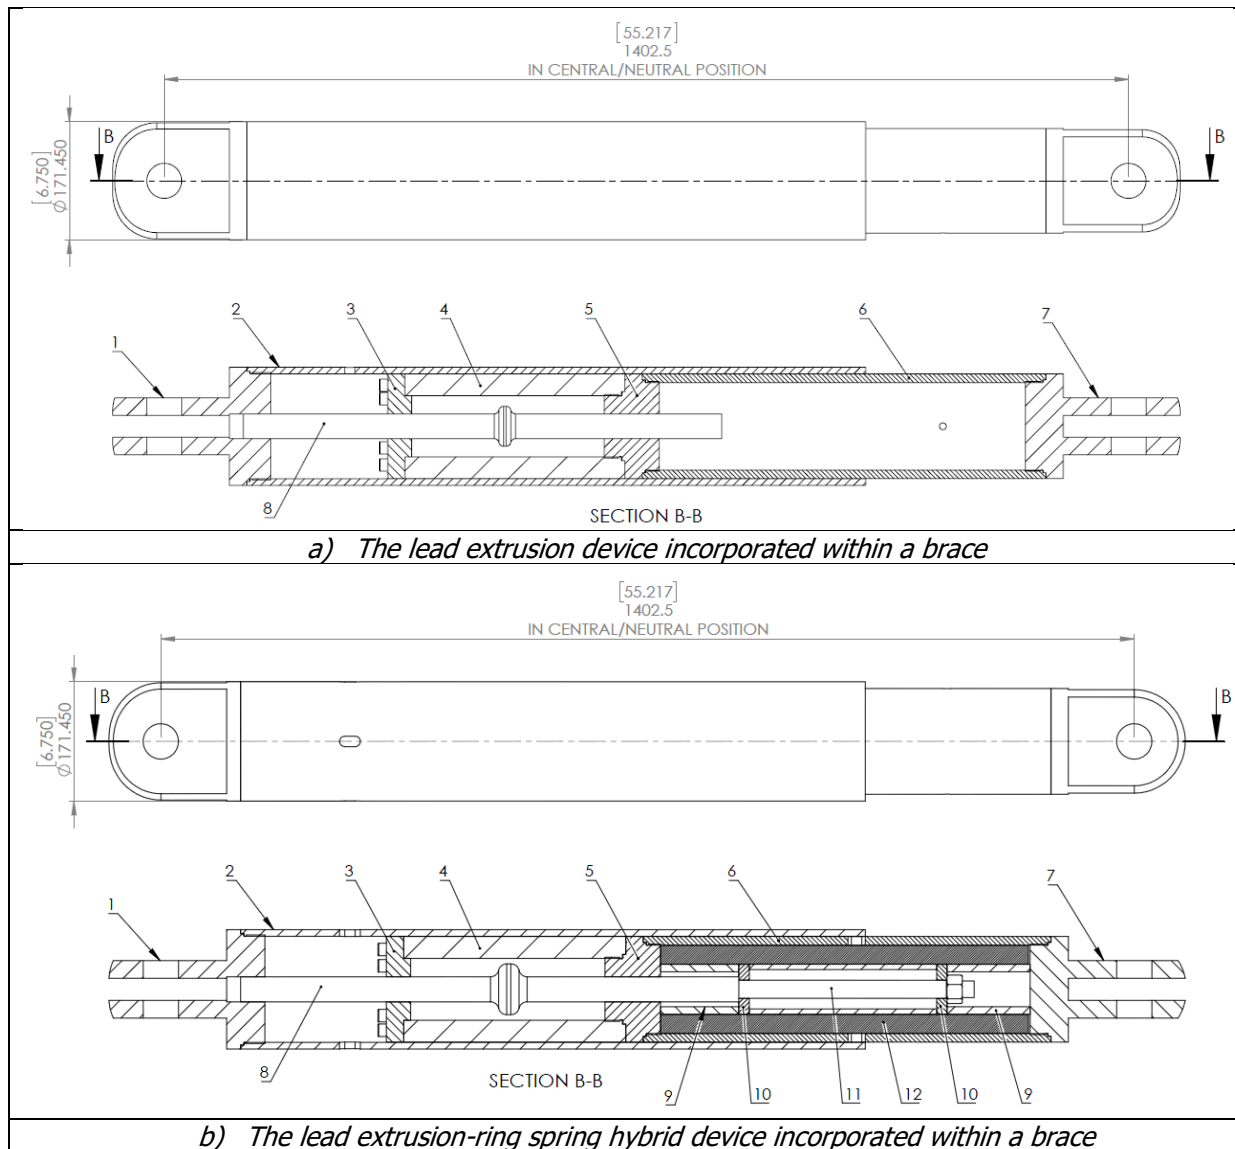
Cross-section view of the lead-extrusion and ring-spring hybrid damper, with and without the inclusion of the spring components.
